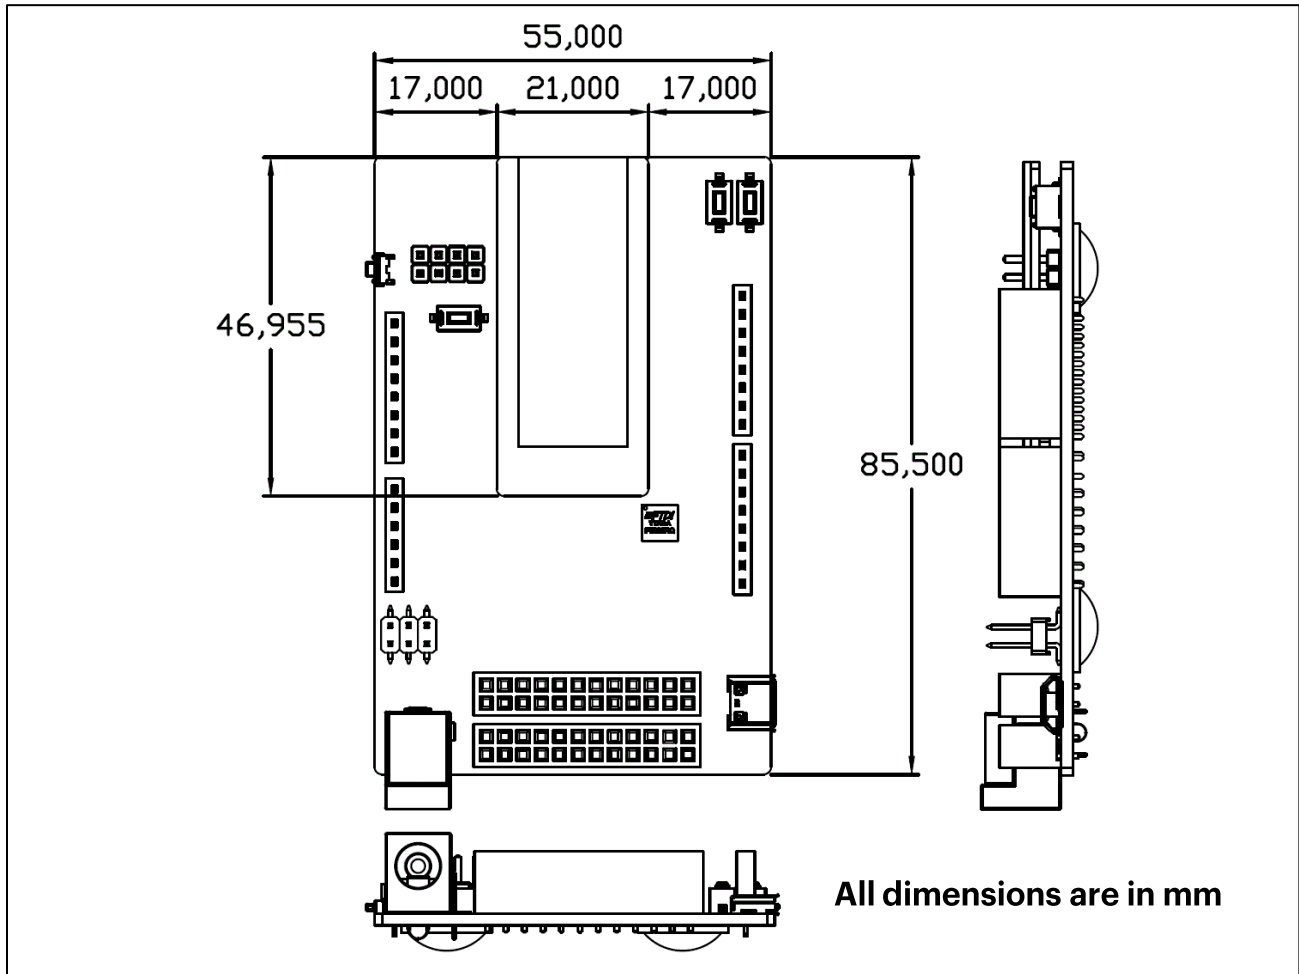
Mechanical Dimensions ARTIK 053 Starter Kit
